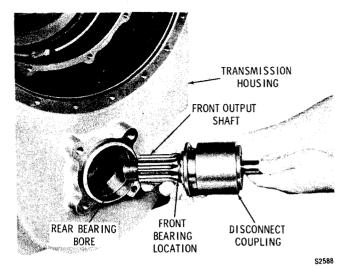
Installing front output shaft and disconnect coupling (-1 models with two-piece output shaft)
